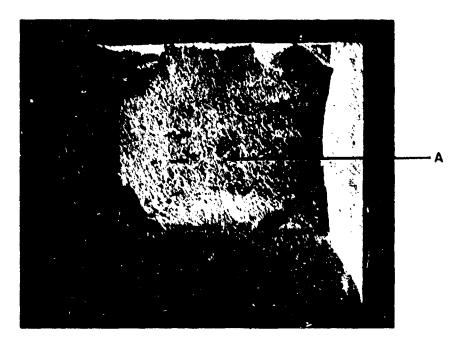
Tensile fracture surface of a temper-embrittled A-514 weld specimen, 15x.
